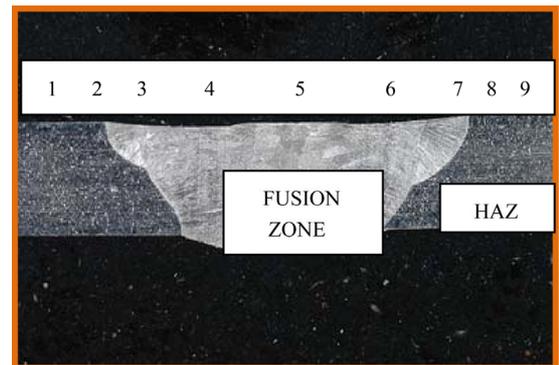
Location of hardness measuring points on the weld joint.
